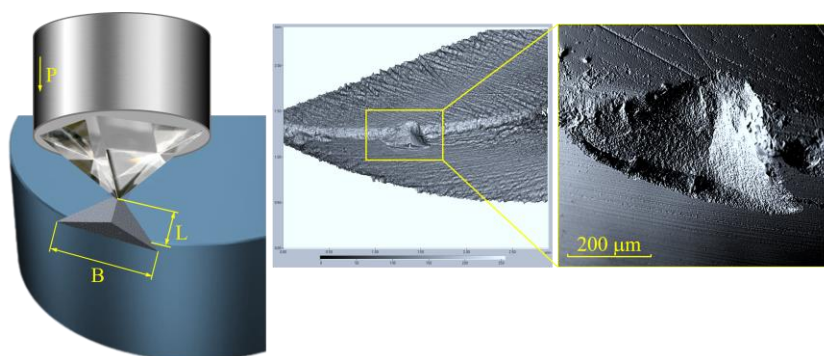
Technique for measuring the fracture resistance of tool ceramics.
